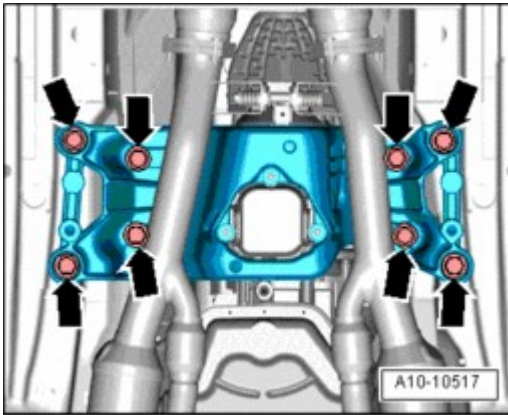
Removing/Installing Bolts On Tunnel Cross Member
